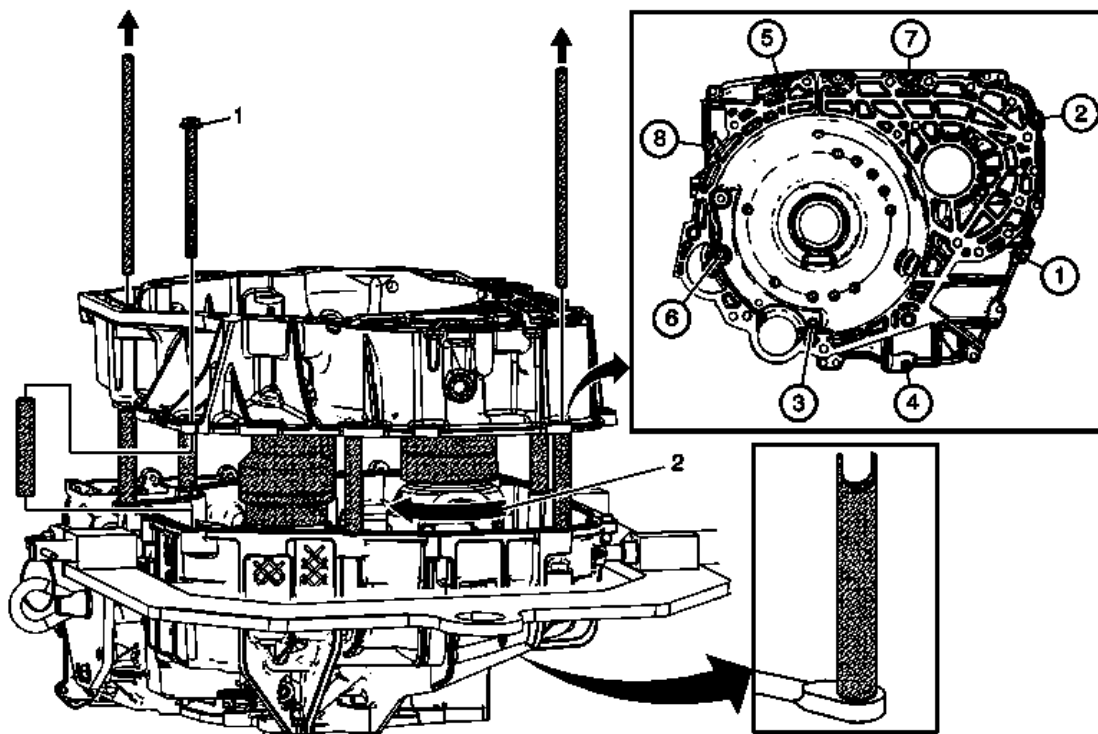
Identifying Front Differential Carrier Assembly Torque Sequence
